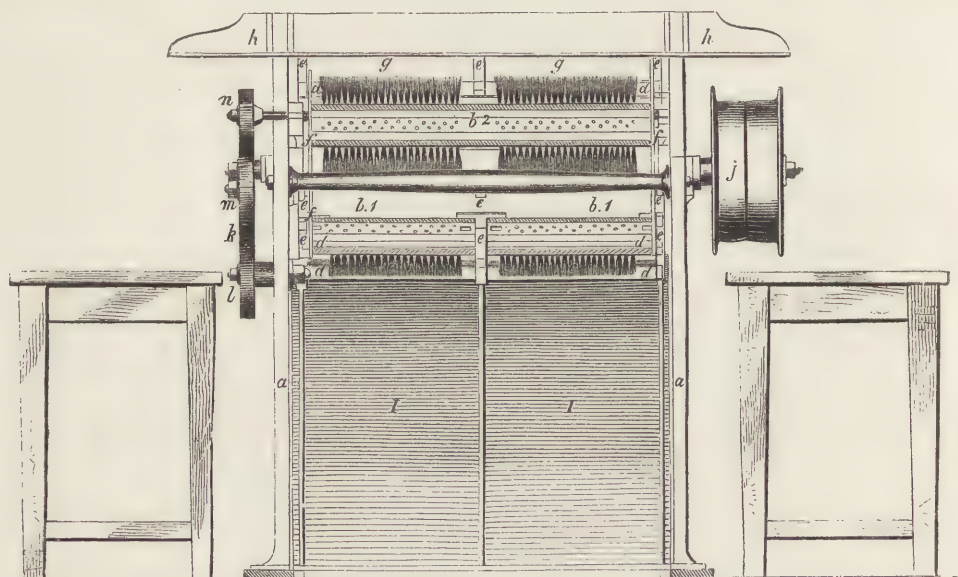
SIDE ELEVATION OF PLUMMER'S FLAX-BRUSHING MACHINE.
